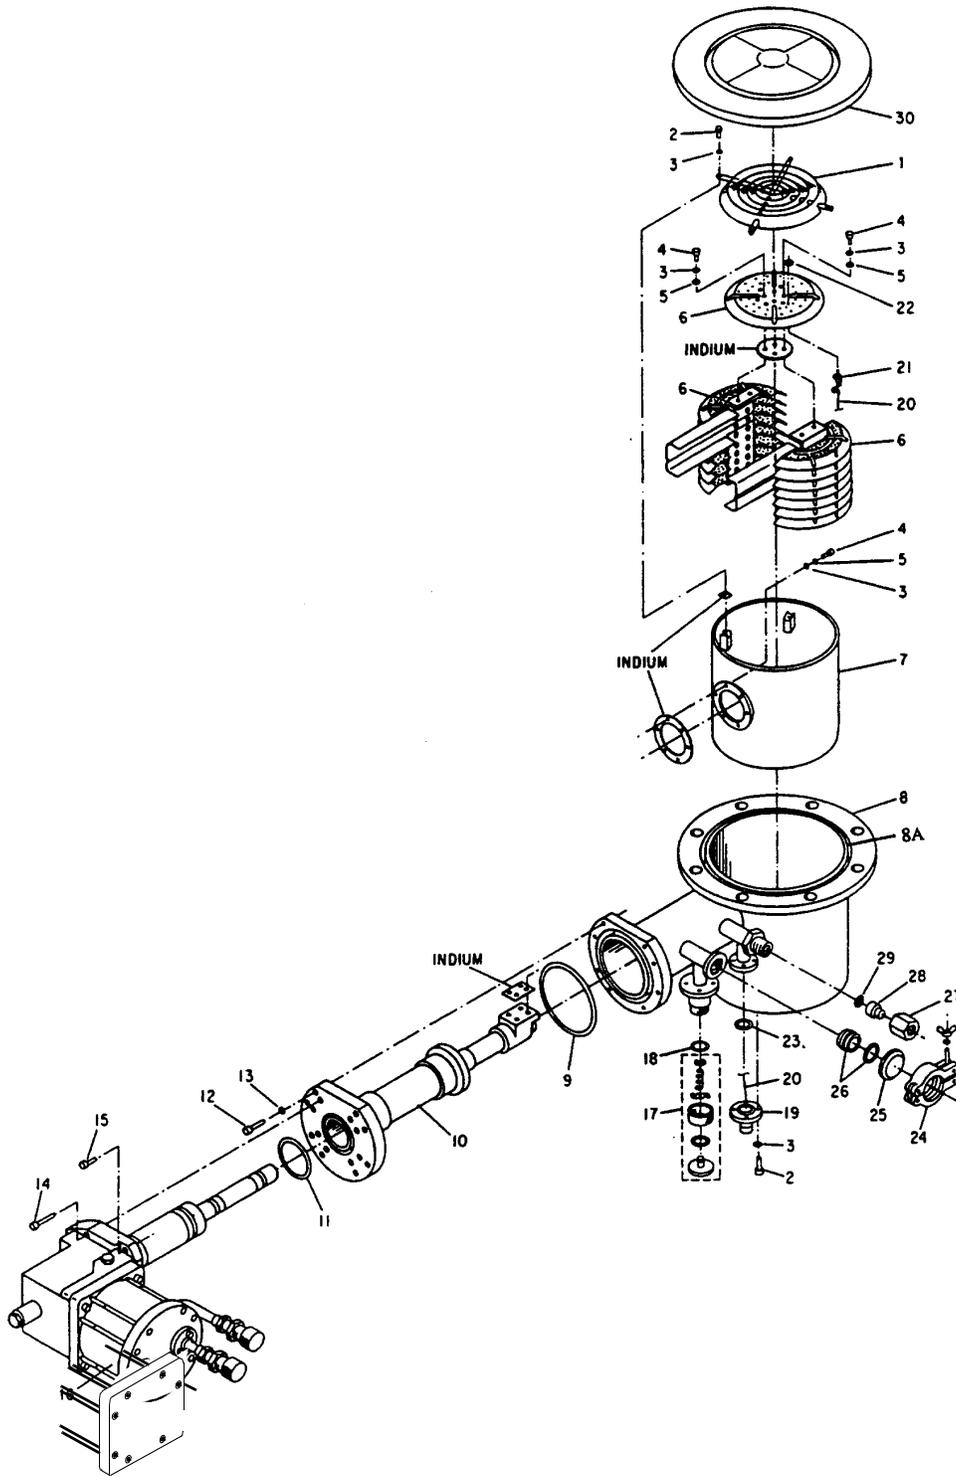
Exploded View of Cryo-Torr 8 Cryopump
